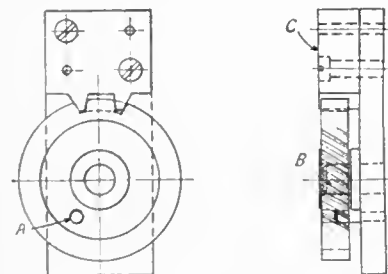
FIXTURE FOR TESTING SPIRAL GEARS.
